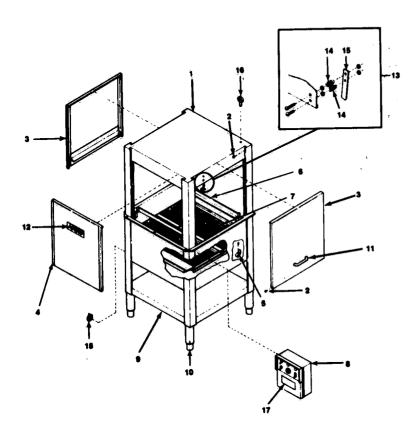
HOOD AND BASE ASSEMBLY (For Thru-wall Mounting Model).
